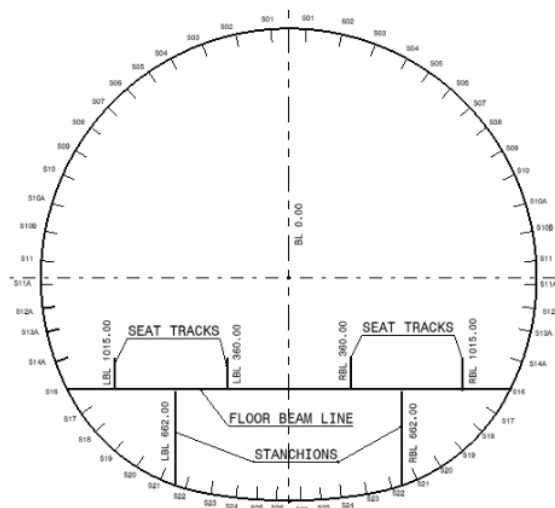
Floor Support Structure Centerline Diagram in Cabin Cross Section View
